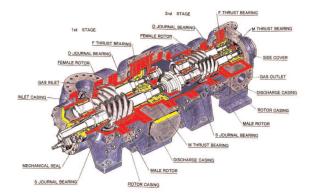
Typical Cutaway Drawing of a Tandem Arrangement Oil-Flooded Screw Compressor.
